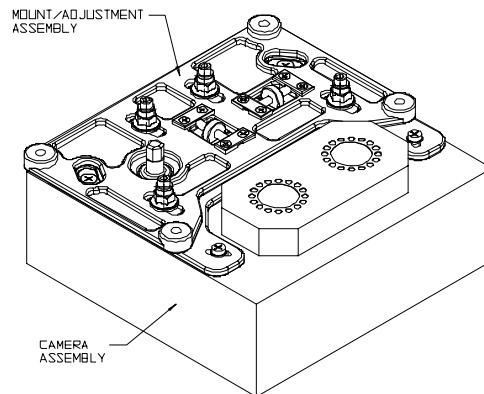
EBCS AVIONICS/CAMERA ASSEMBLY
